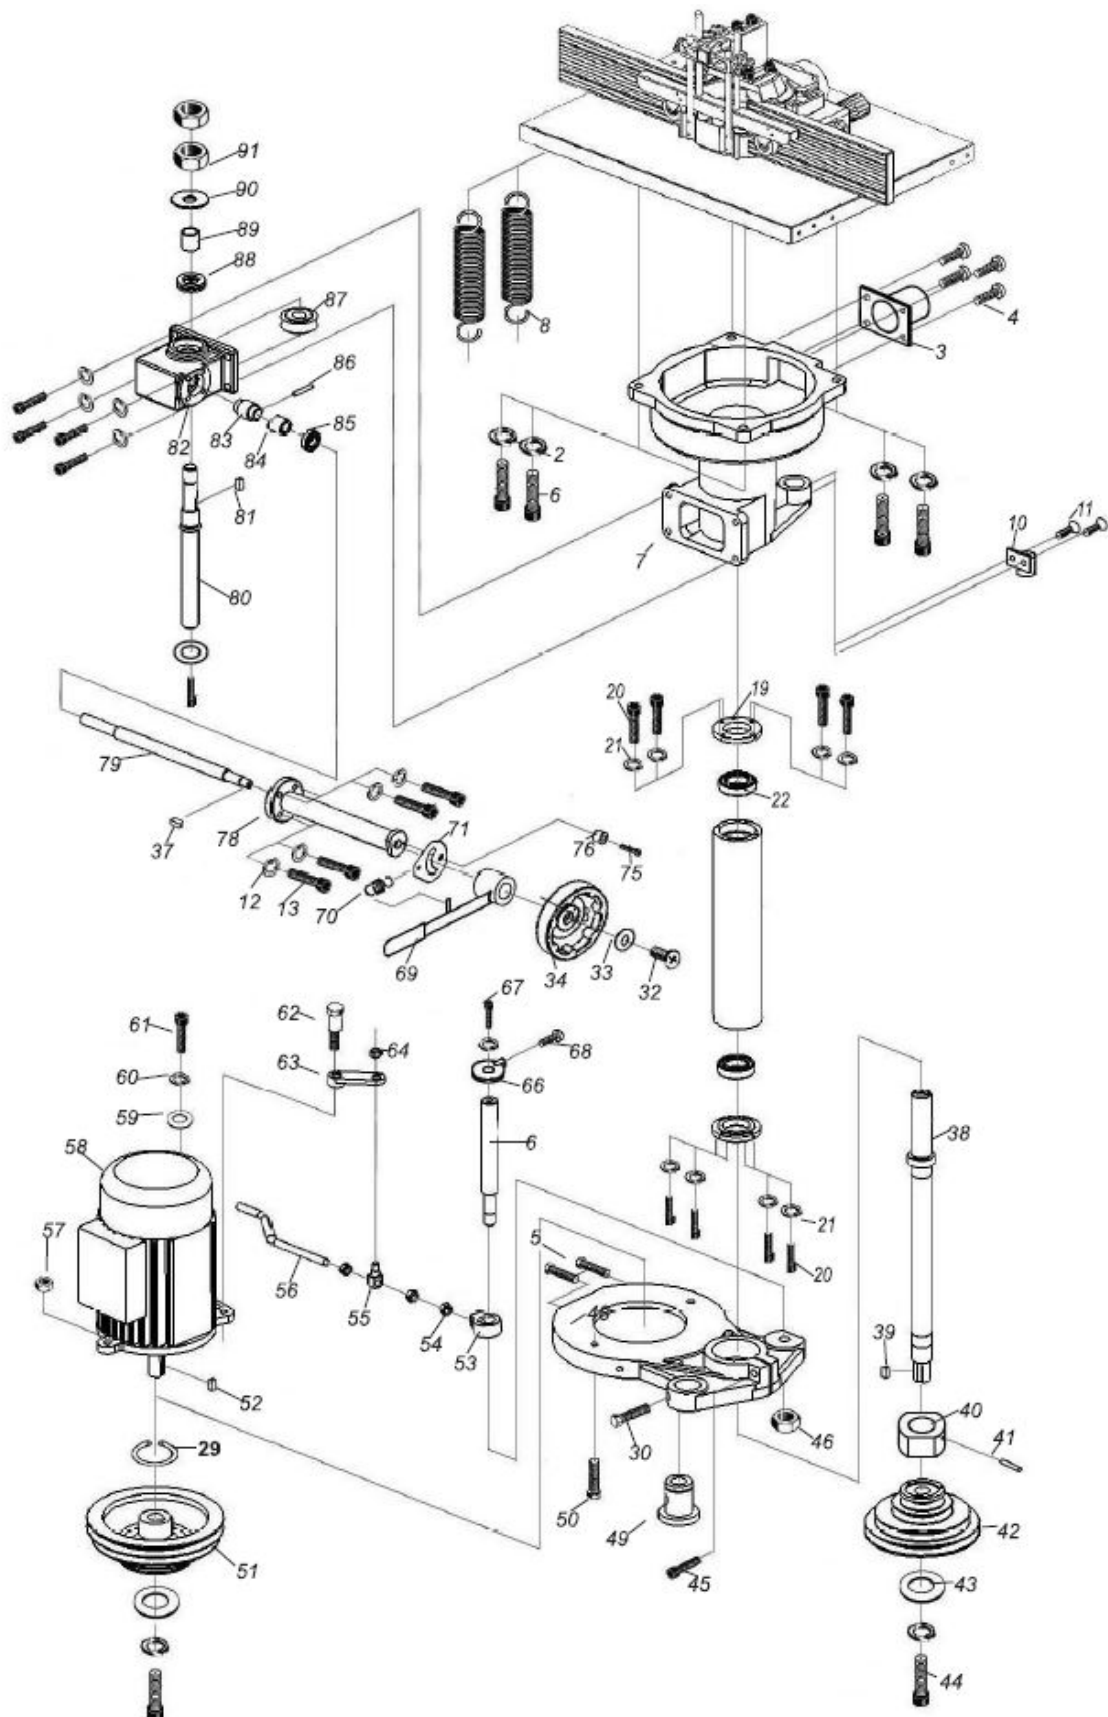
Spare parts drawing 3 - Table router TF 190 E
